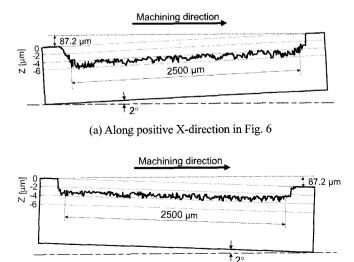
Profile of the machined groove by EDM milling on a tilted
